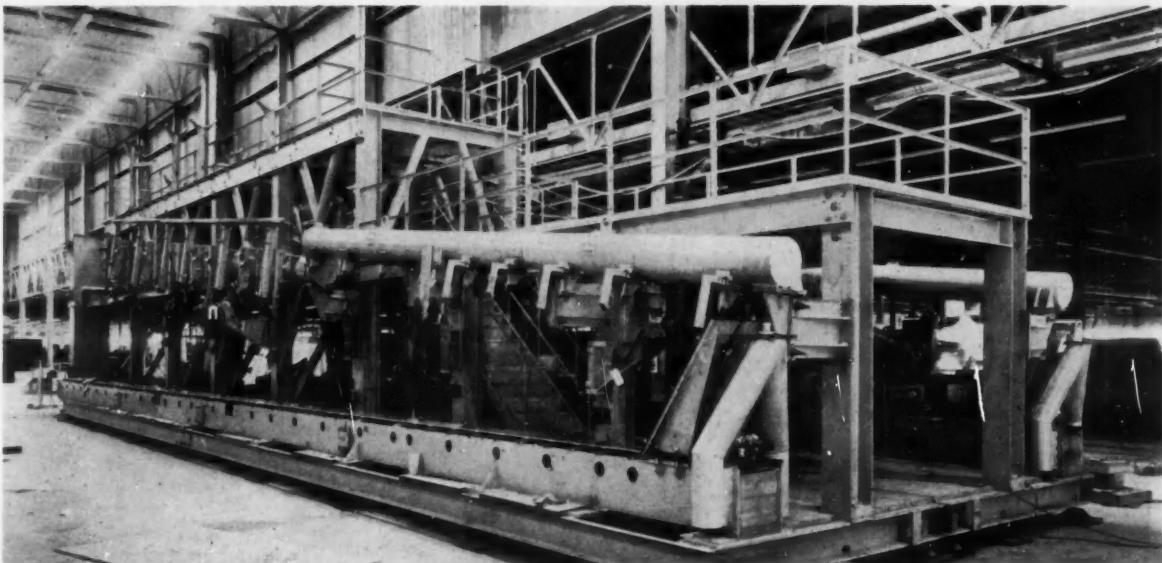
Fixture used in building B-47 wing. This fixture has been designed so that it can be moved to a new location should decentralization become a necessity
